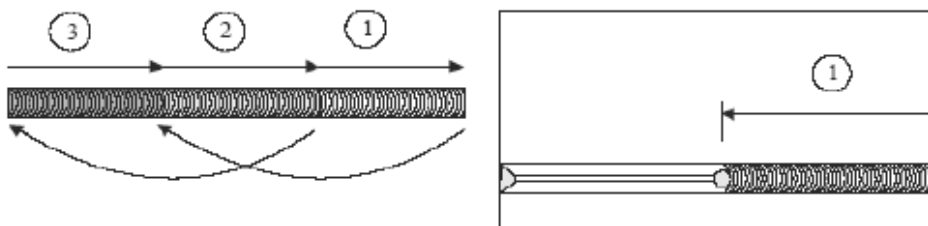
c Welding sequence for cracks with length less than 300 mm
